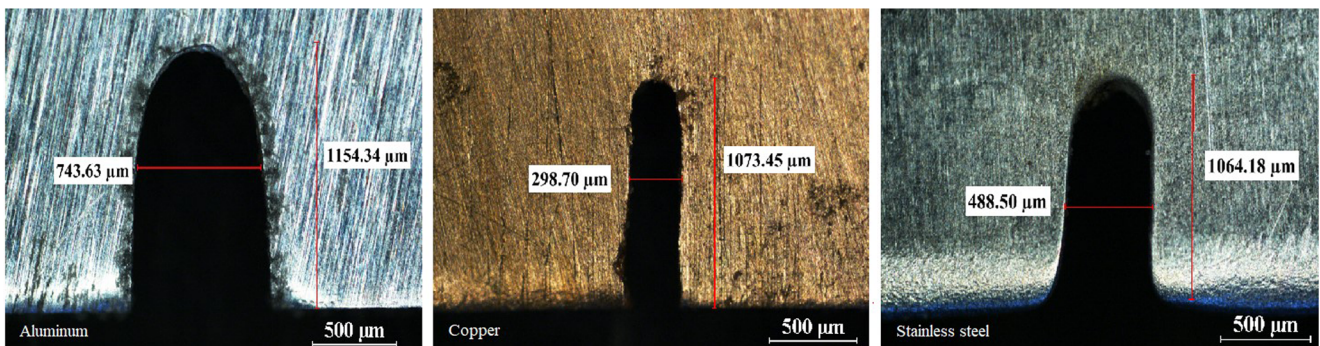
Machined slits on aluminum, copper, and stainless steel
